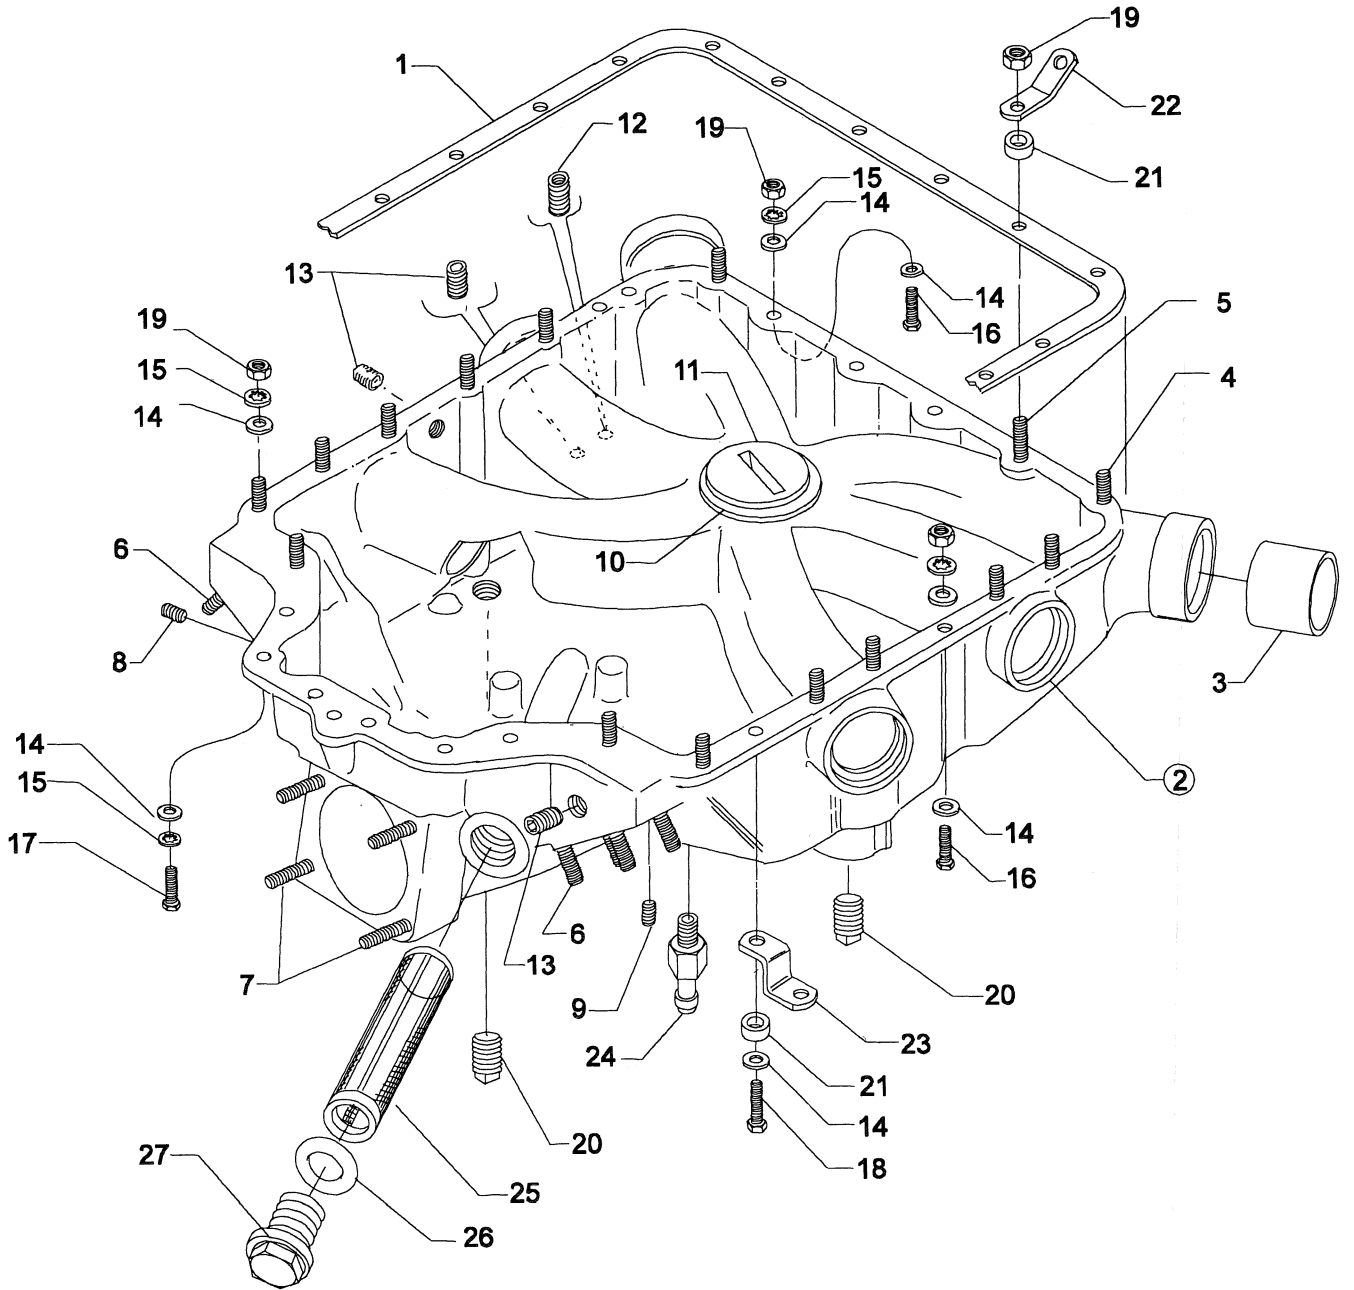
OIL SUMP ASSEMBLY AND ATTACHMENTS
